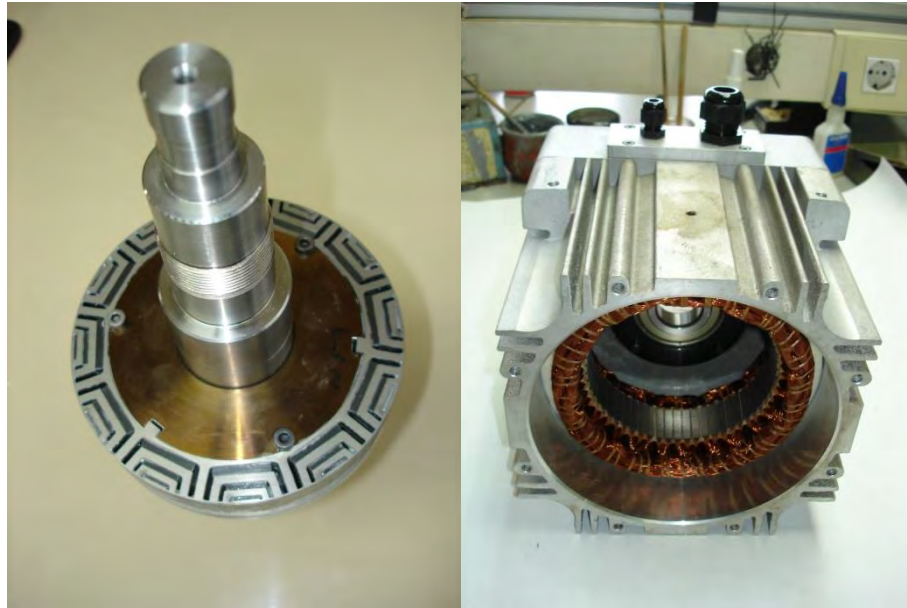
Left: Rotor, magnets, and shaft. Right: Stator, winding, and housing.
